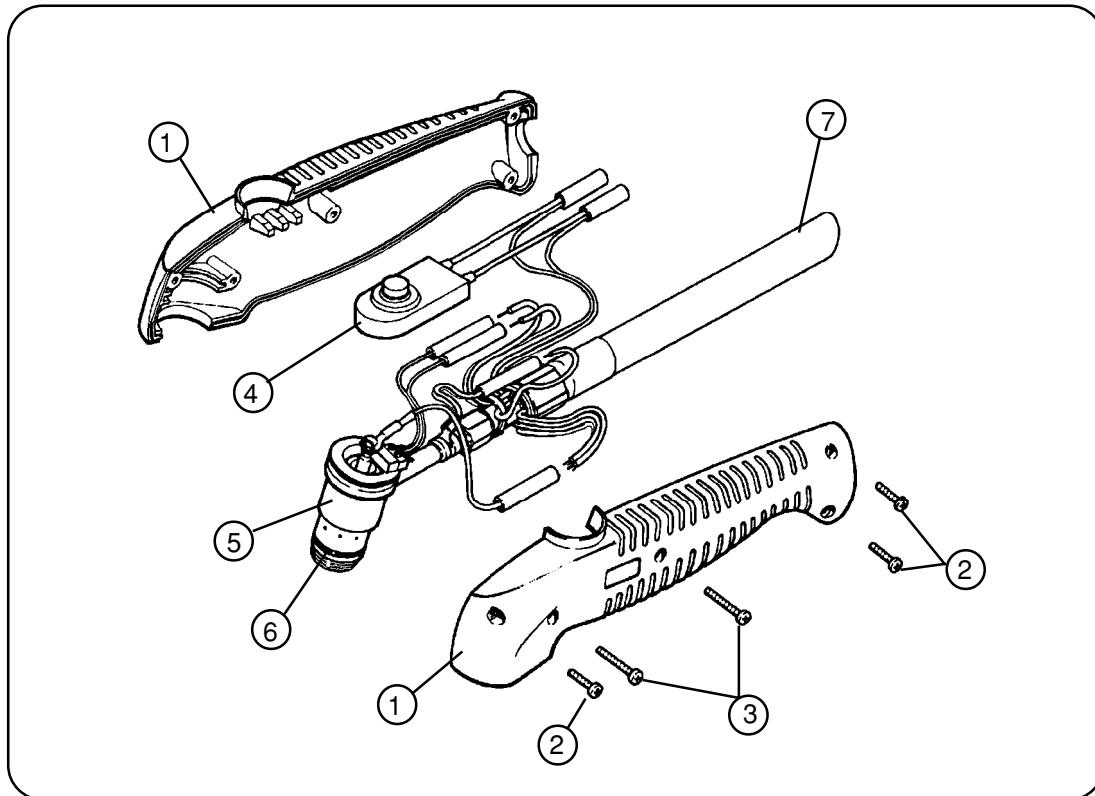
PAC110 Torch Assembly and Torch Leads
